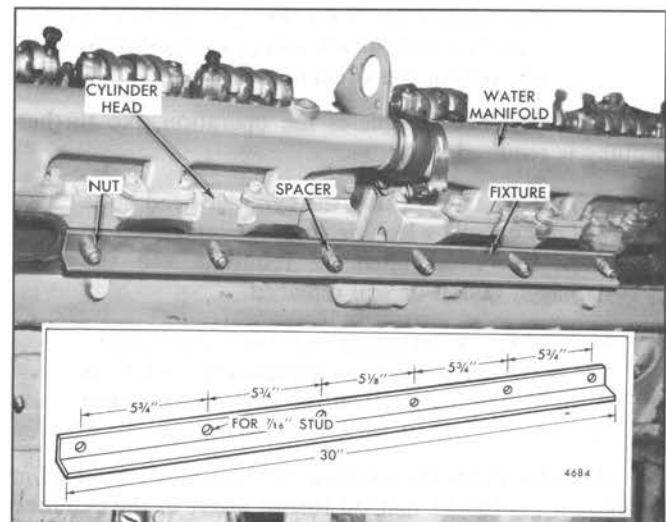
Cylinder Head Alignment Fixture for 12V and 16V Engines
